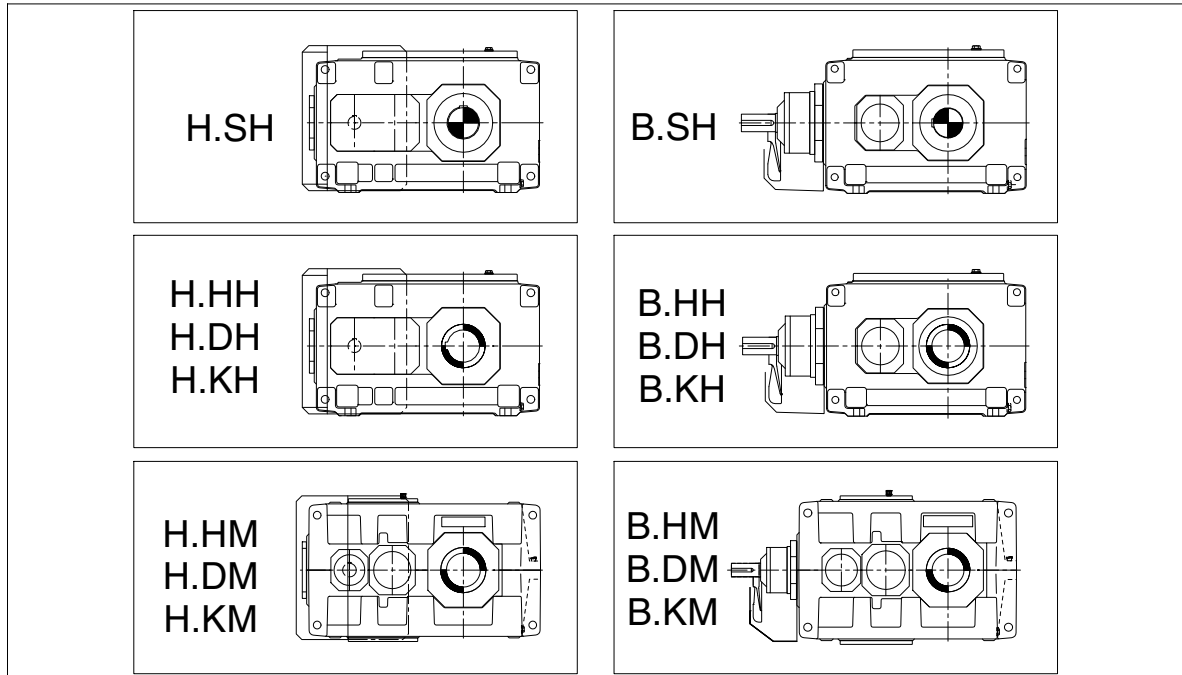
Helical-gear unit and bevel-helical gear unit of types H... and B...
